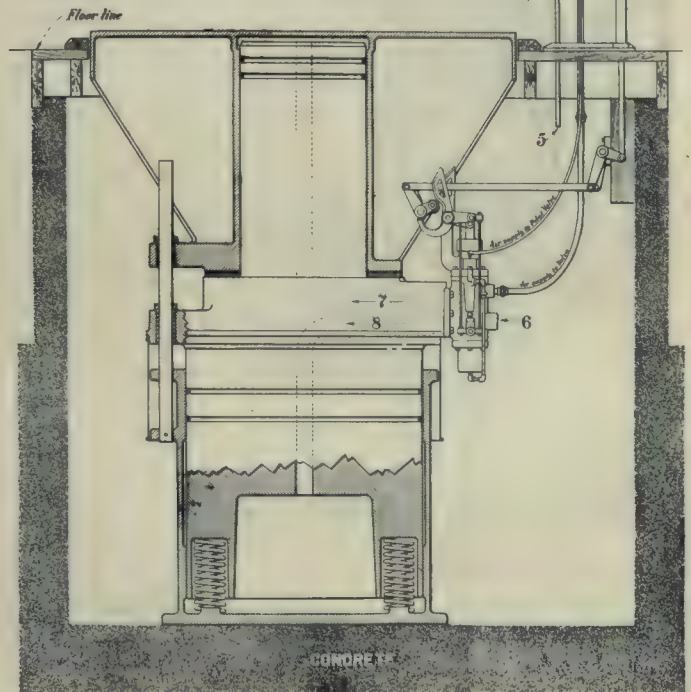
Jarring Machine Installed in Pit With Linkage to Operate Levers.
